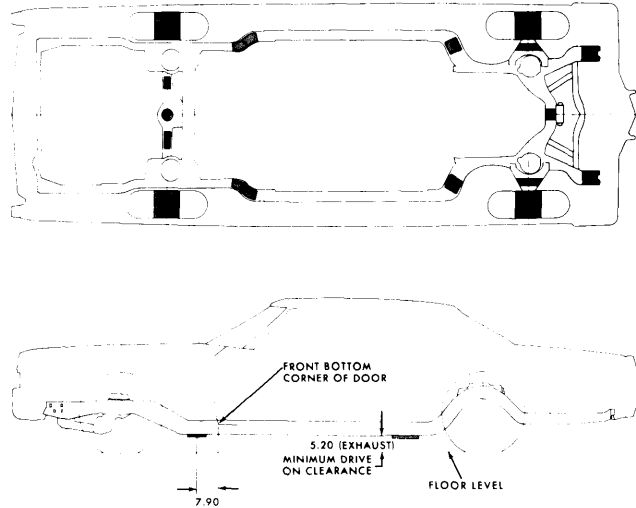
Cadillac (Exc. Eldorado & Seville) Lifting Points
